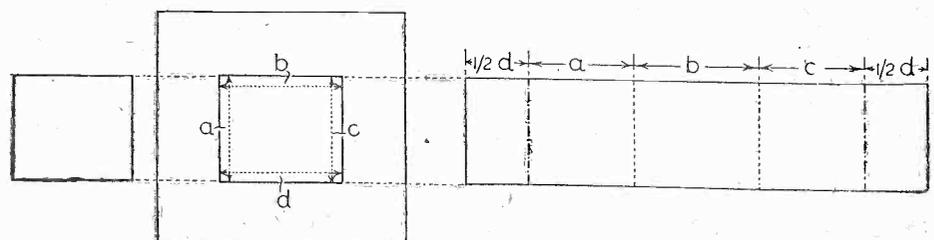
The insulating material for the bobbin should be marked out as shown above. Accurate dimensions are essential.
